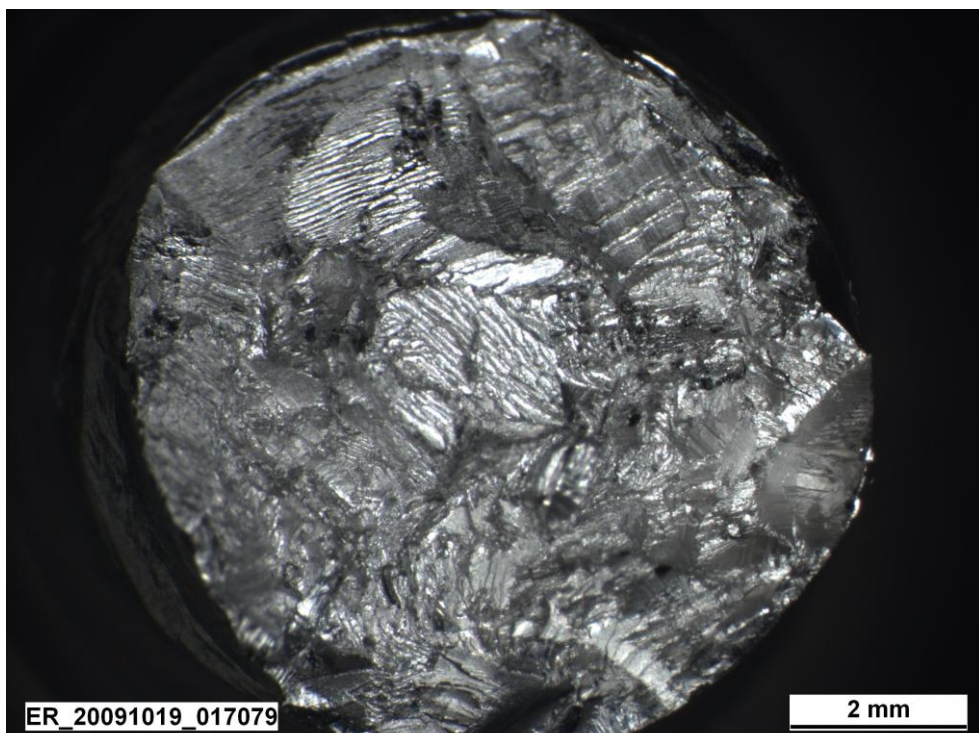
LCF test specimen C8, 725MPa, 62,282 cycles to failure. Surface initiation, largely ductile failure
